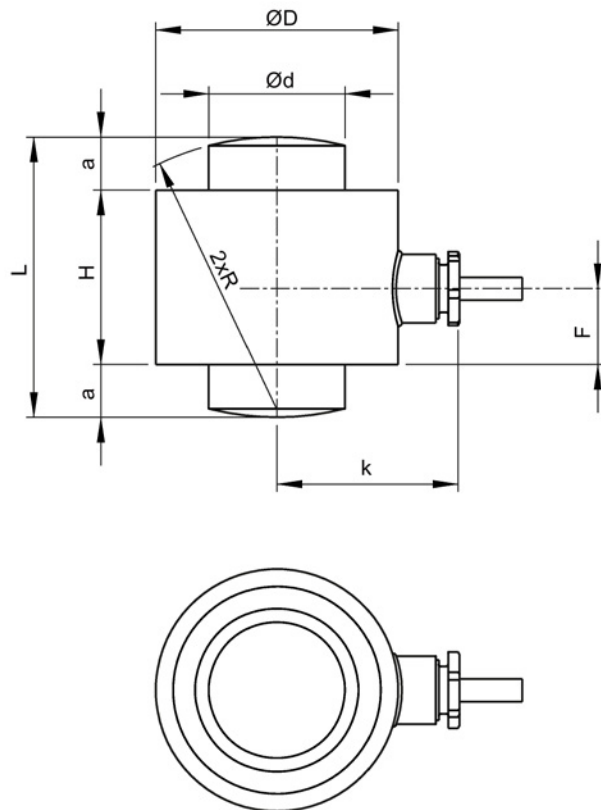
Dimension drawing for SIWAREX WL270 K-S CA
